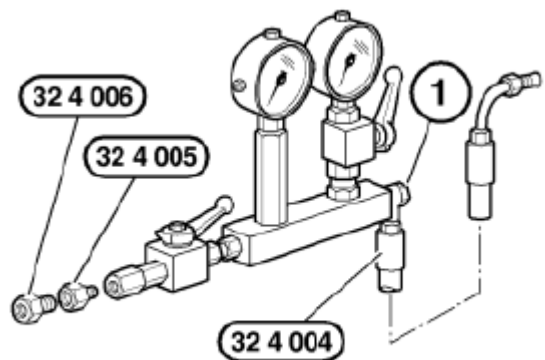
Identifying Special Tool 32 4 004 And 32 4 005
